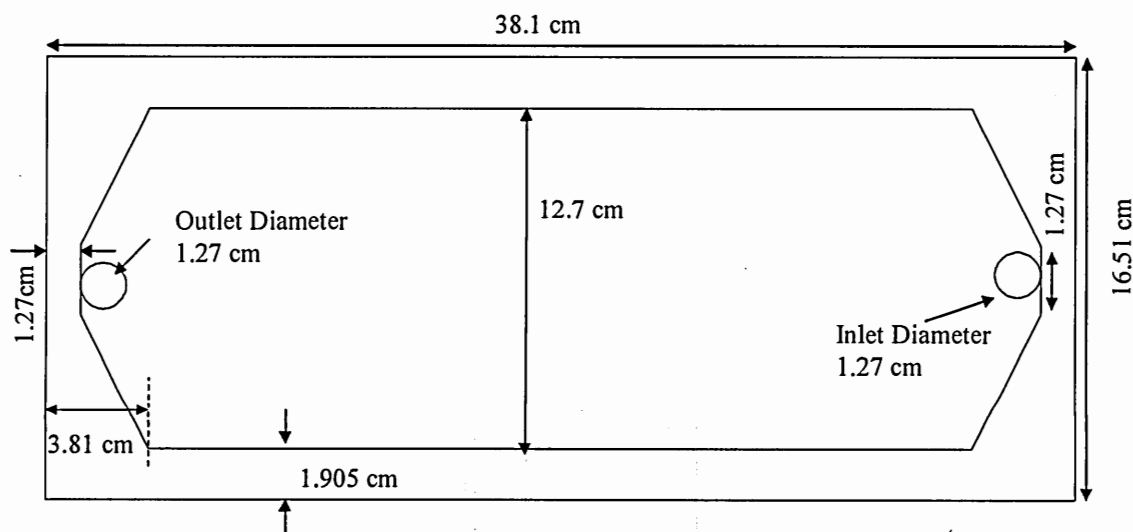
Dimensional sketch of the bench-scale surface crystallizer test cell with length and width indications. This part was custom machined from a 0.635 cm thick piece of Teflon
